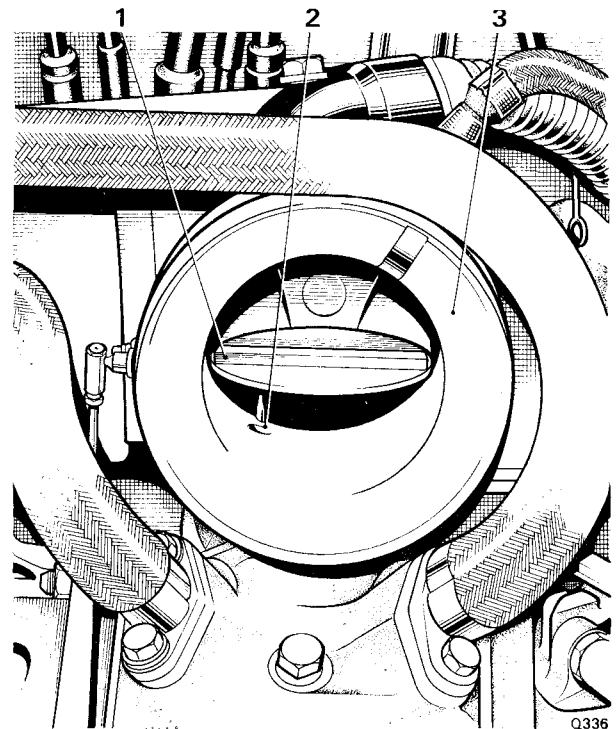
HOT IDLE MIXTURE COMPENSATOR FEED
